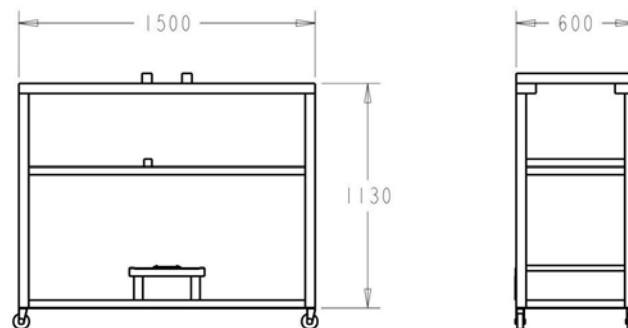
Drawing of the Mounting Frame (Paul 2004).
